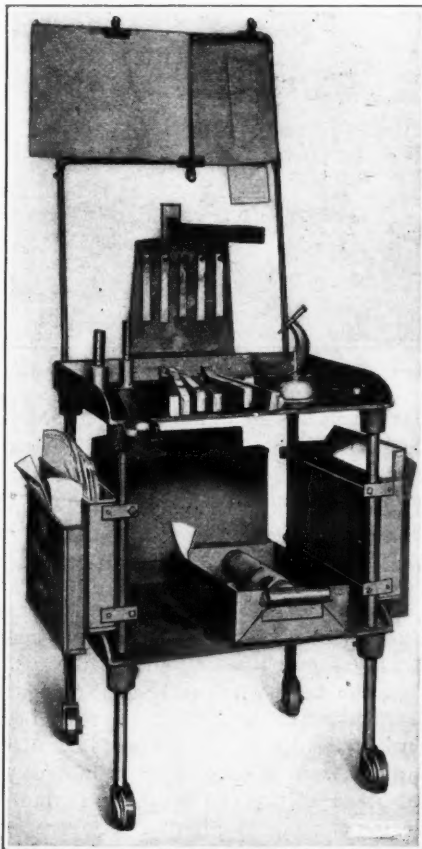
Shop Tool Stand for holding Tool List, Instruction Card, Blueprints, and Sets of Tools
